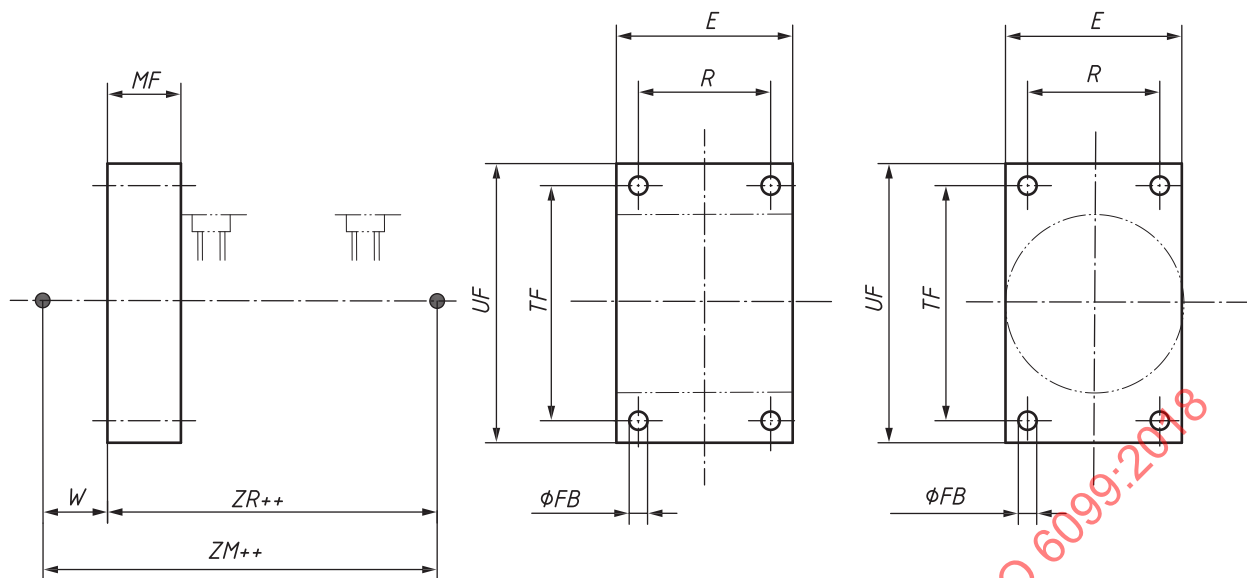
MDF1 — Head, rectangular flange — Double rod
